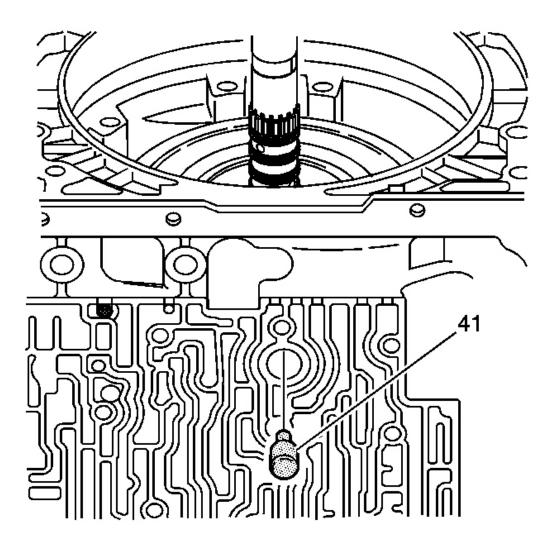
Identifying Band Anchor Pin Courtesy of GENERAL MOTORS CORP.
